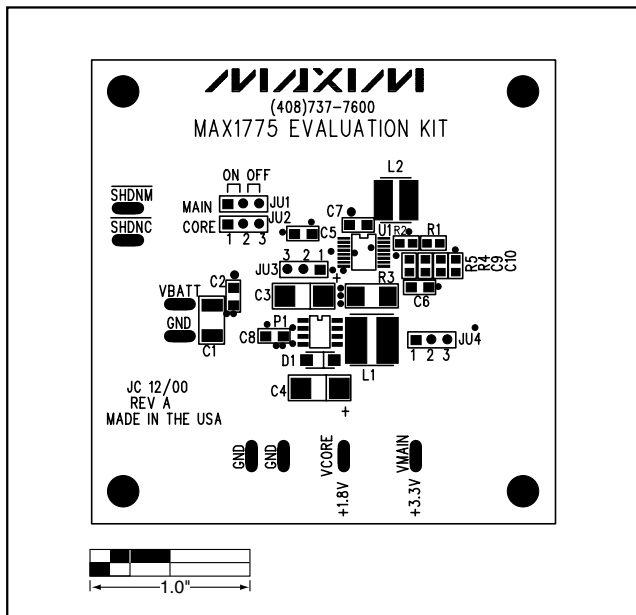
MAX1775 EV Kit Component Placement Guide—Component Side
